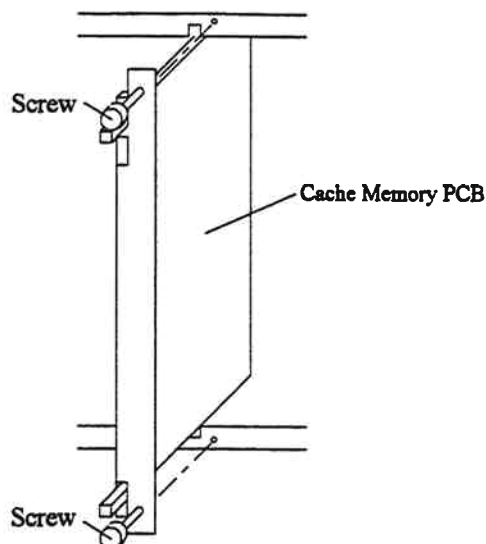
Removal of the Cache Memory PCB
